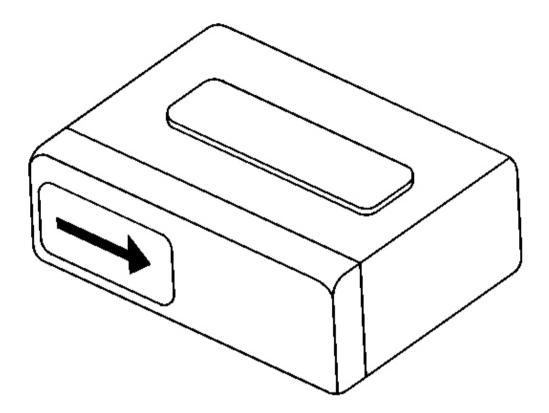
Sliding Door On Remote CD Changer To Lock Courtesy of GENERAL MOTORS CORP.
